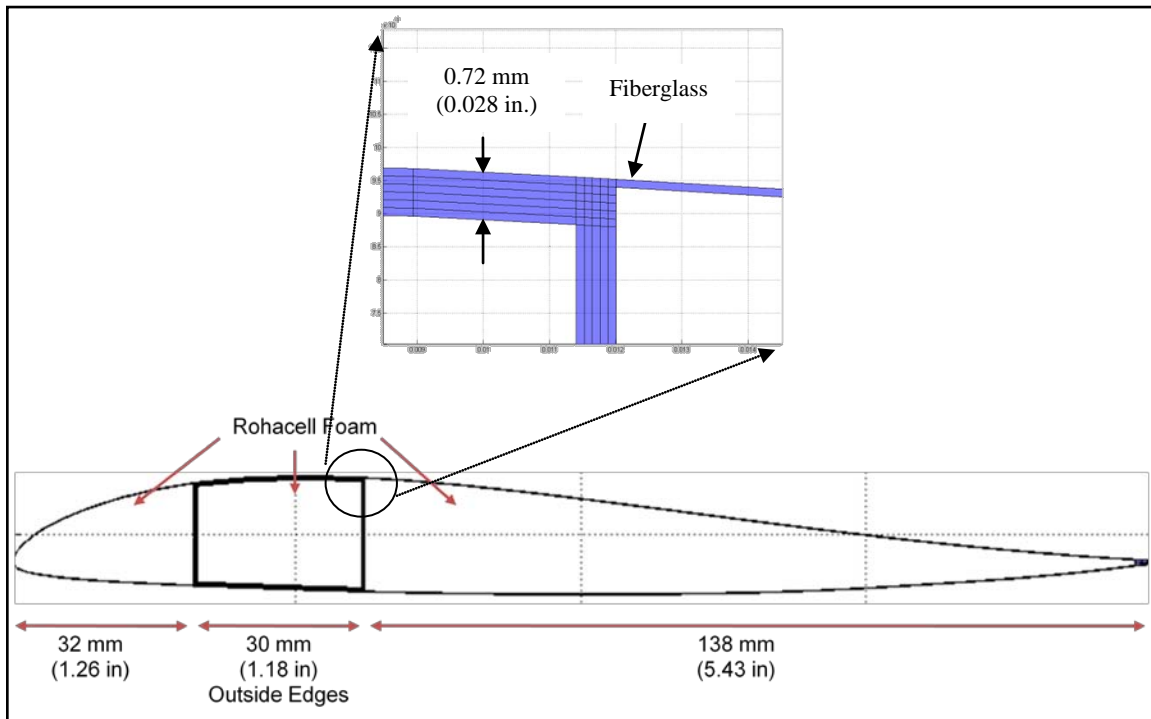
Cross section of X-HALE wing with additional detail of wing box corner area (detail shows individual layers of fiberglass in blue) [28]
